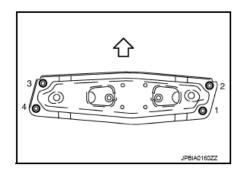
Rear Engine Mounting Member Bolt Tightening Sequence Courtesy of NISSAN NORTH AMERICA, INC.
